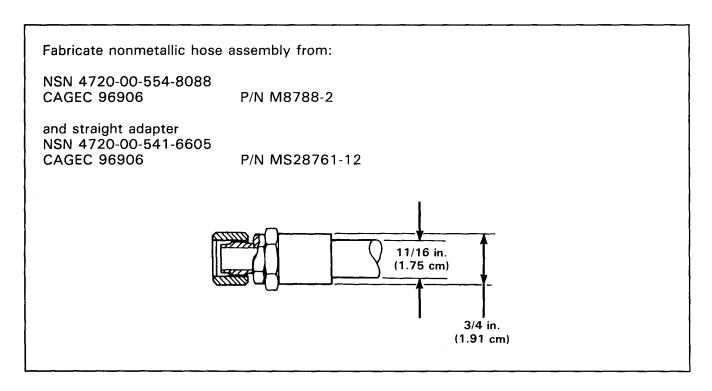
Nonmetallic Hose Assembly (MS28762-12-0470)
